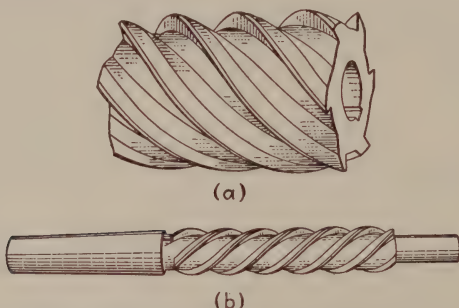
Helical milling cutters: (a) hole type; (b) arbor type.
